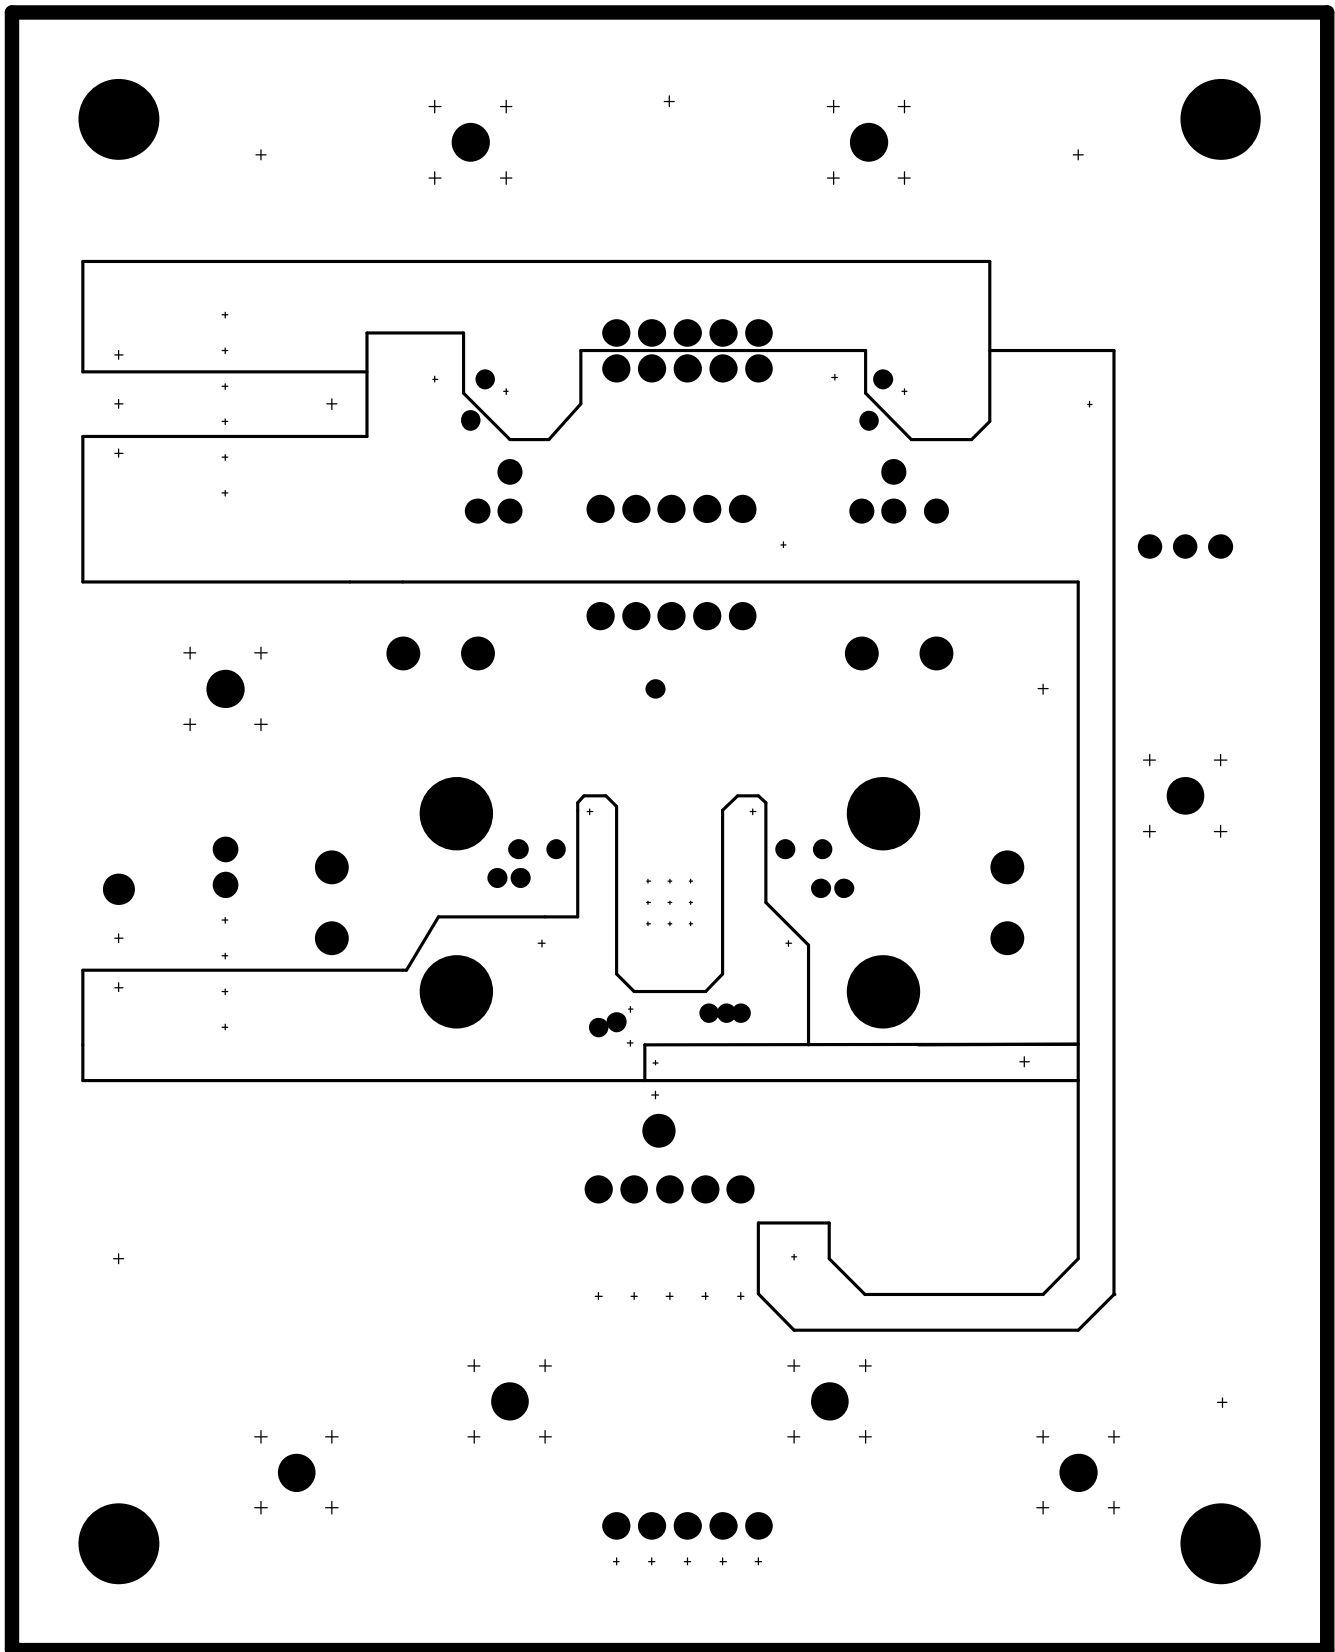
VCA2615EVM PCB Power Layer (Top View)
